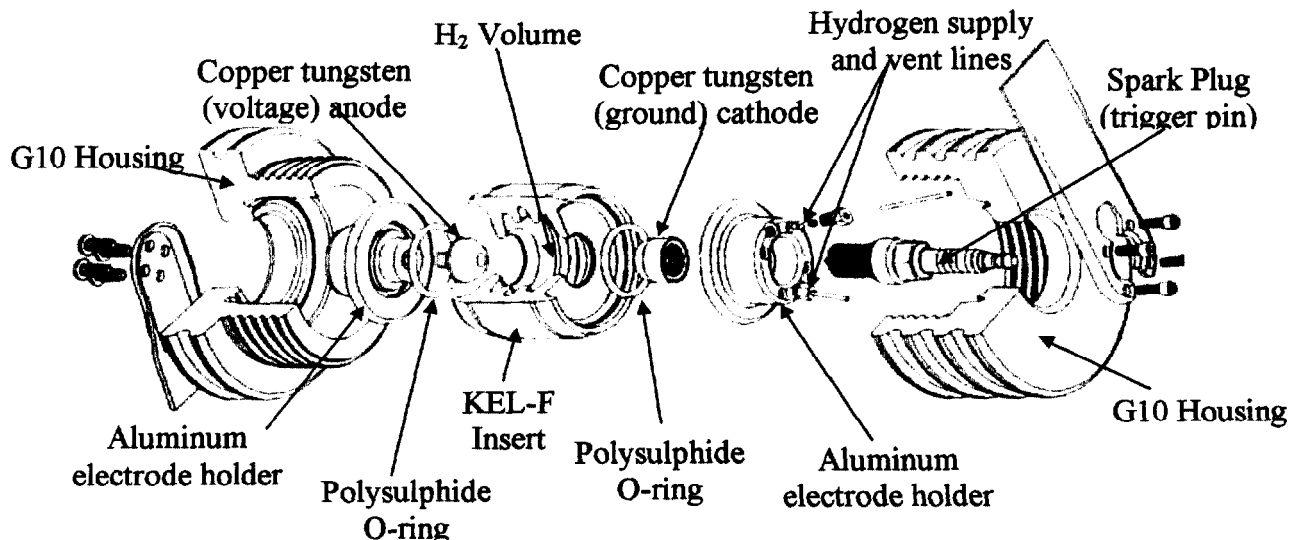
Exploded view of trigatron showing details of the mechanical design.
